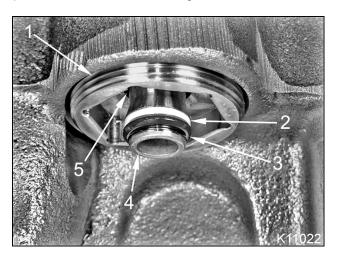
Injector oil inlet adaptor installed in high-pressure oil manifold
